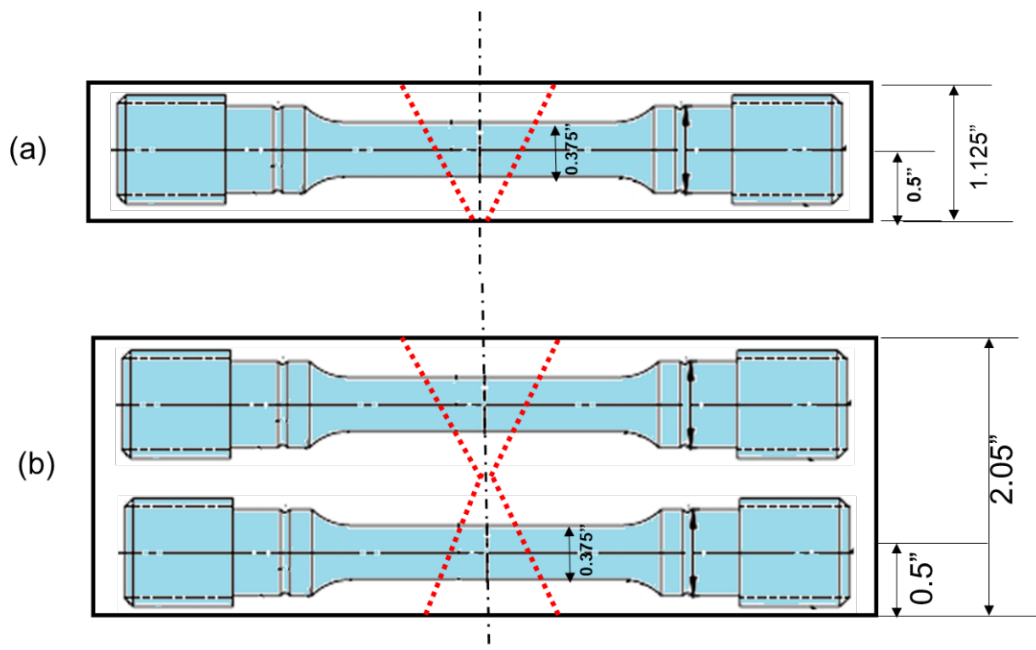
Schematics of the location of the cross-weld weld creep specimens.
